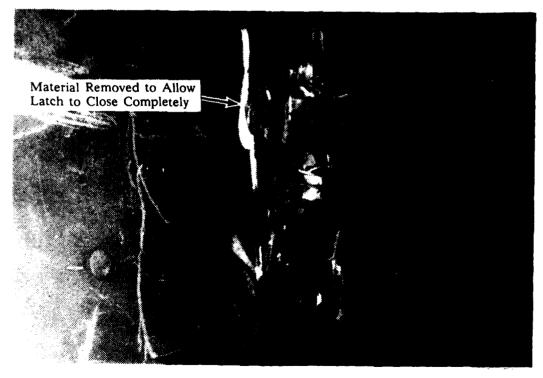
IEAFS Latch Lever with Material Removed to Allow Complete Closure
